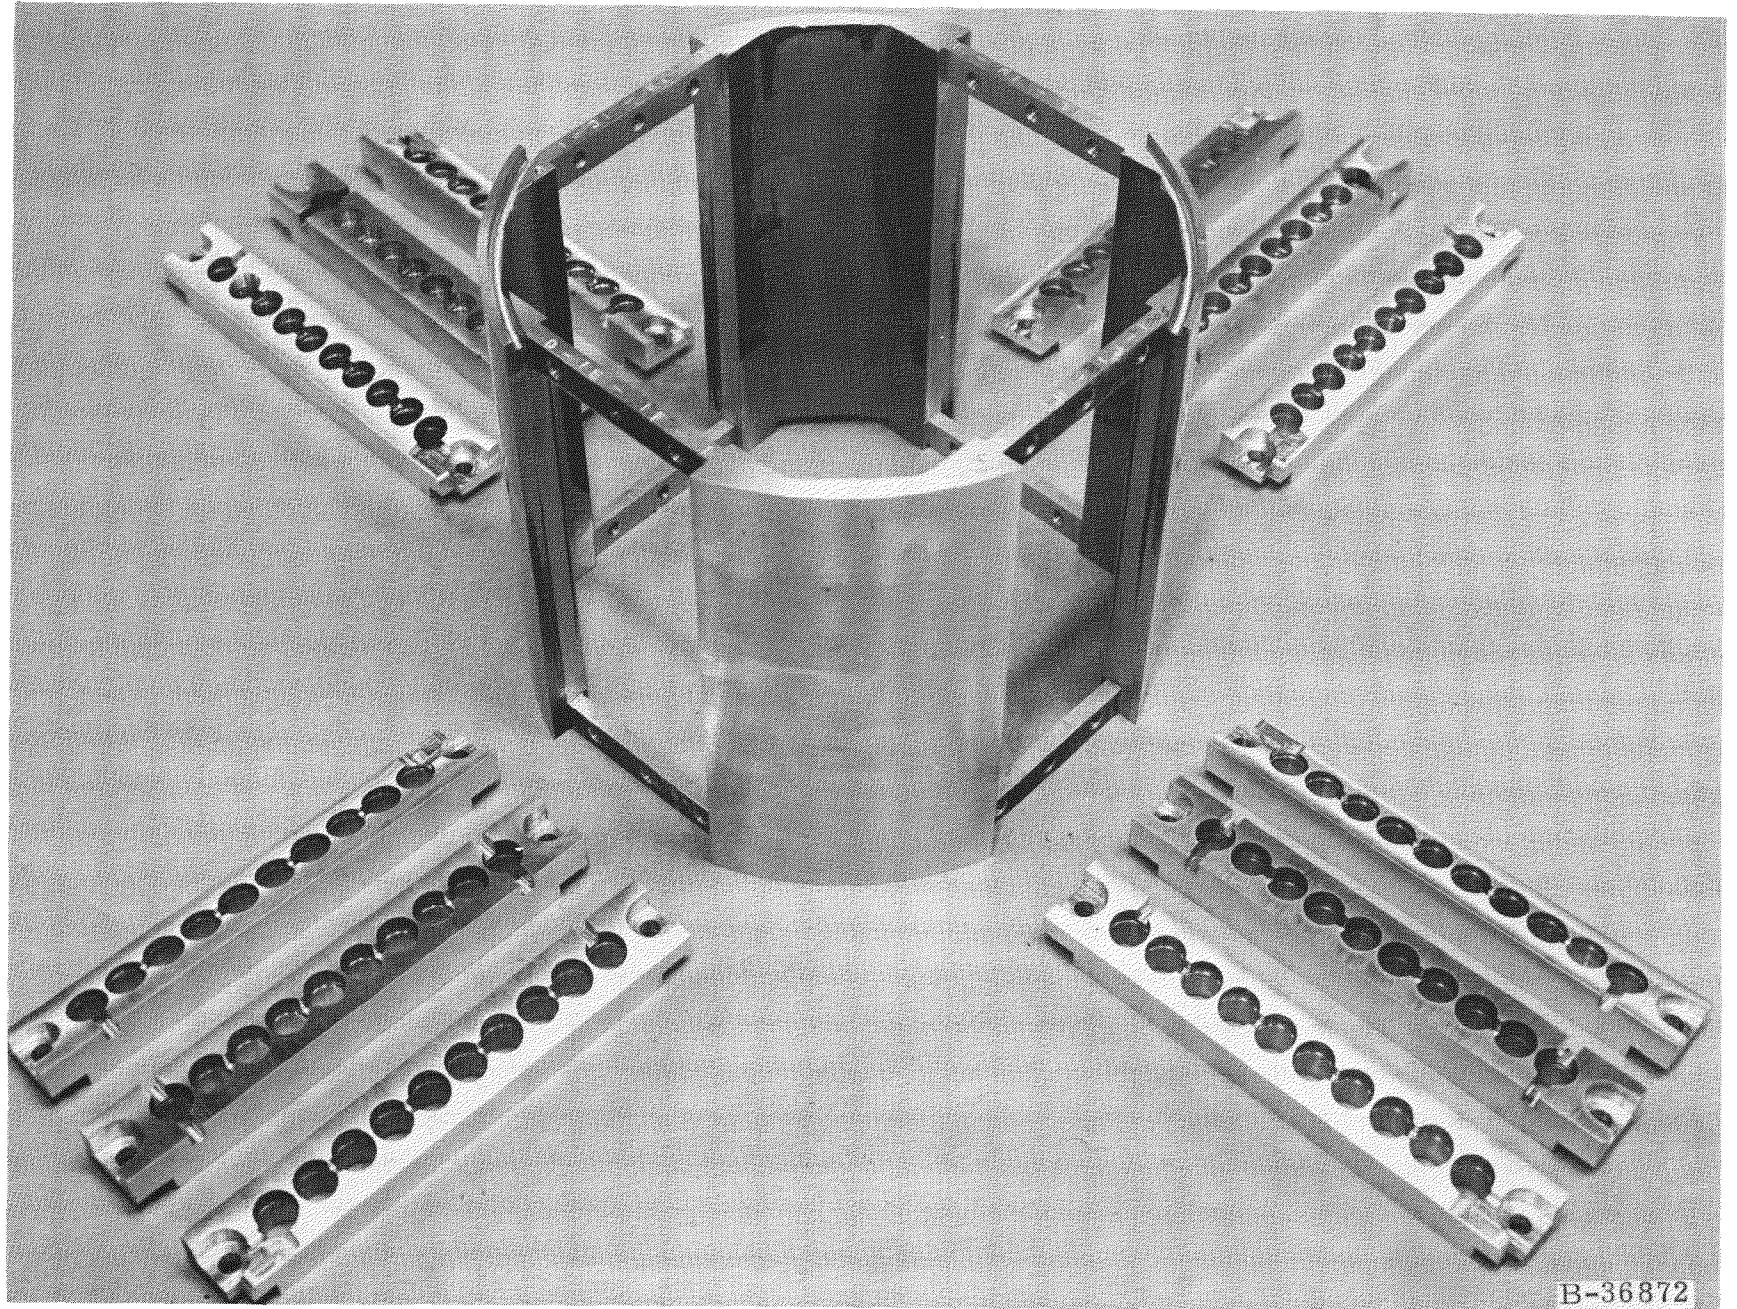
SNAP 7A and 7C Heat Sink Disassembled
